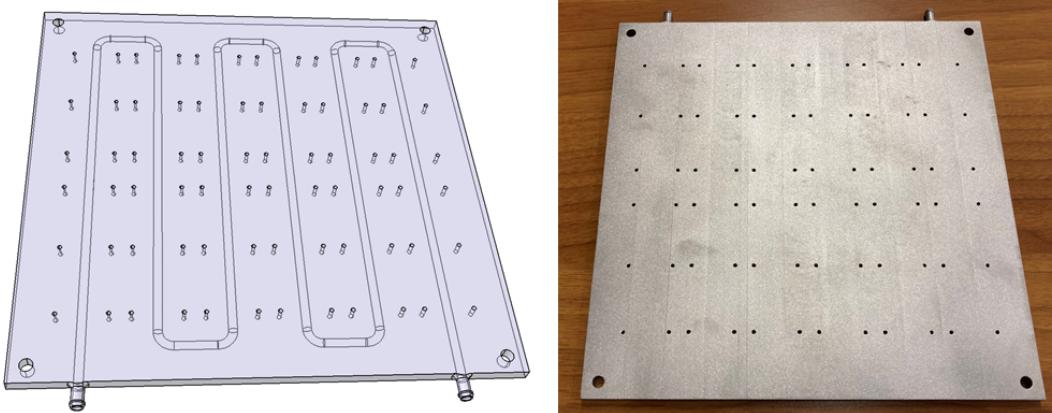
Left: 3D model of the cooling plane with cooling channels visible. Right: the first prototype of cooling plane, produced for the thermo-mechanical mock-up.
